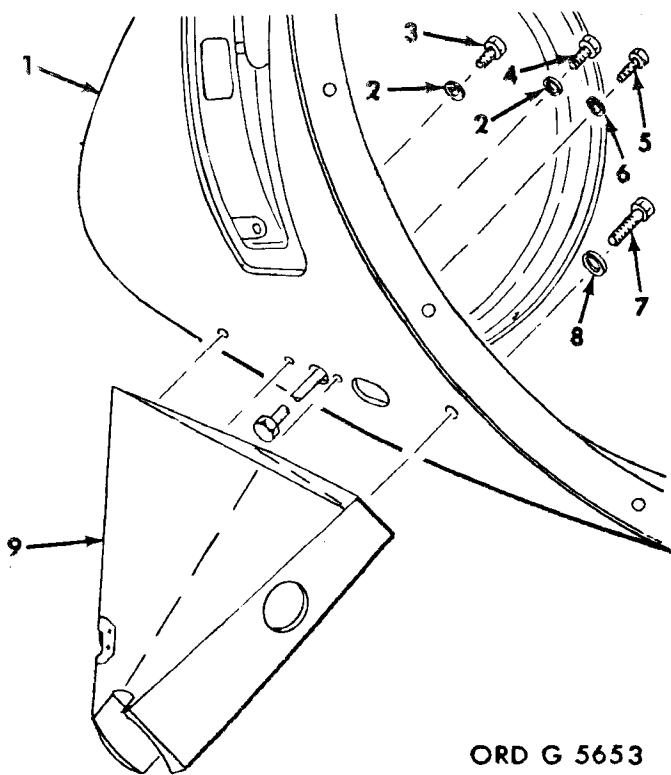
Removal and installation of the forward fin assembly (Missiles 10206 through 11935).
